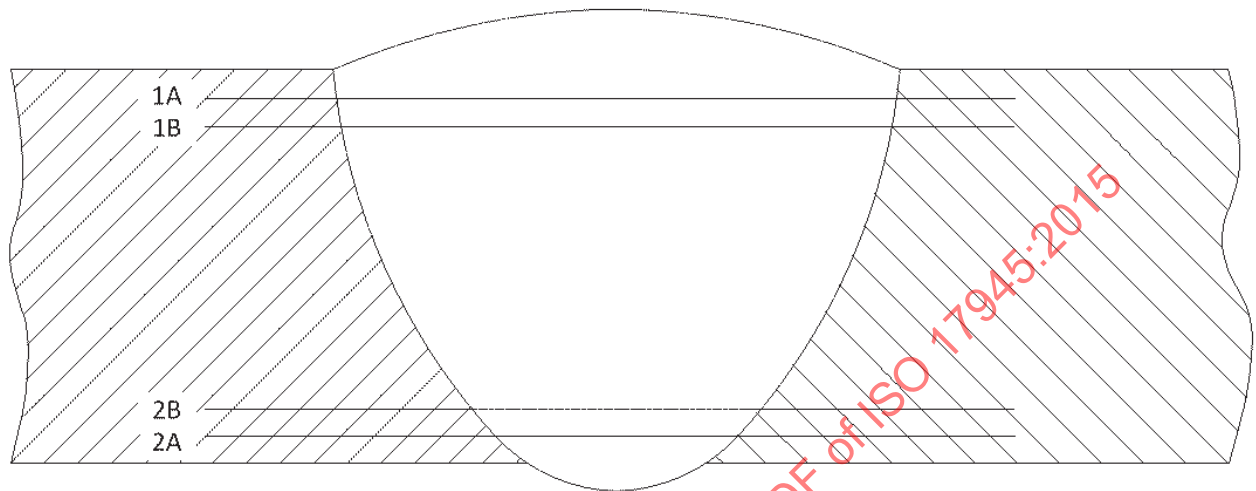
Rows of indentations in butt welds from one side
